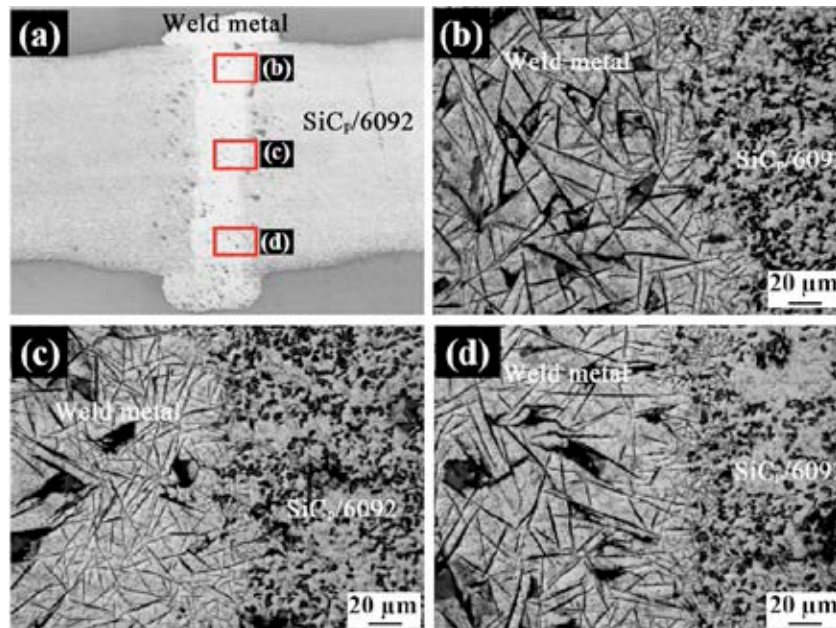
Microstructure of weld at 1700 W and 25 mm/s: (a) overall weld morphology, (b) top of the weld, (c) middle of the weld, and (d) bottom of the weld (Zeyu et al., 2023)
